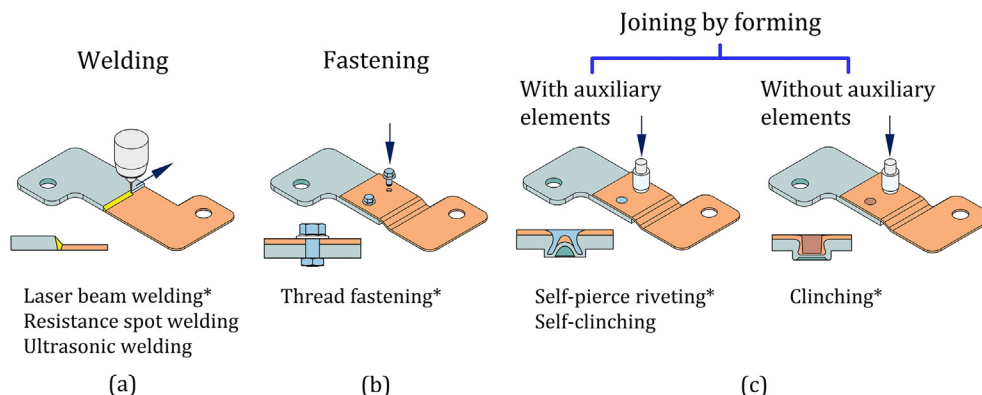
Connection of aluminum and copper strips in hybrid busbars by means of (a) welding, (b) fastening and (c) joining by forming with details of the corresponding cross sections. The asterisk ‘\*’ refers the process shown in the top figure.
